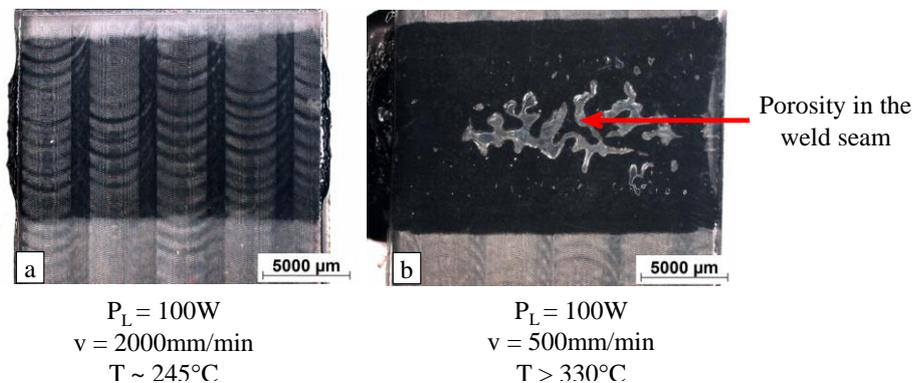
Exemplary weld seam appearance for an ideal welding parameter set (a) and a parameter set leading to overheating (b).
